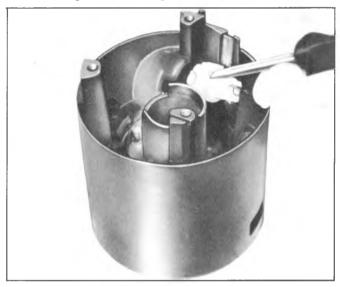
B-70--Removing Ignition Switch Actuator Sector
